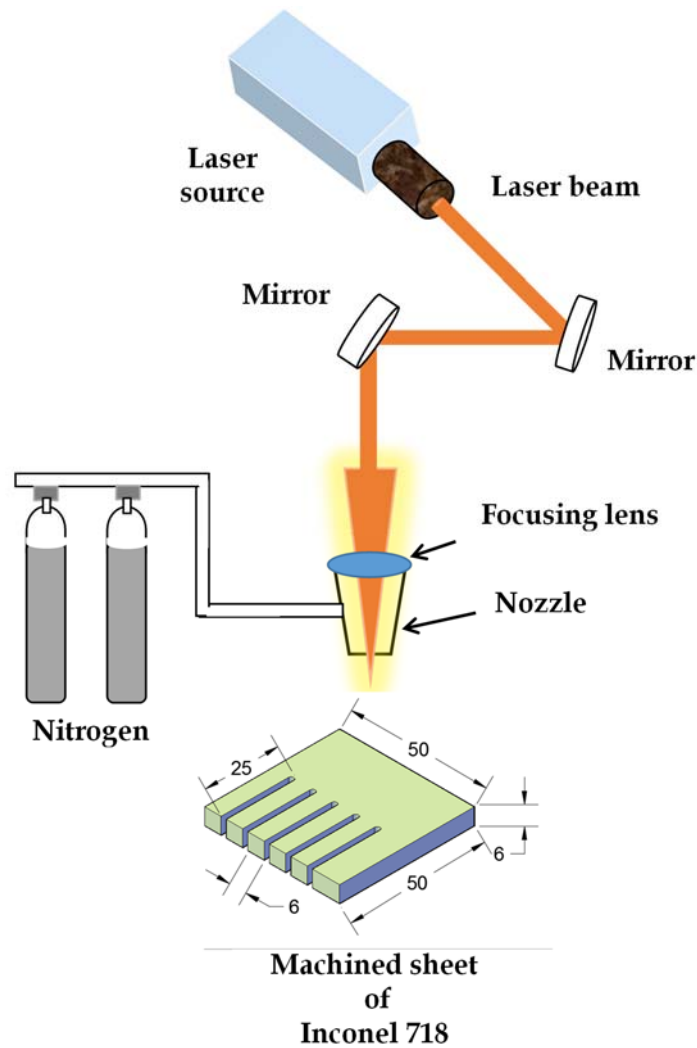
b) Schematic representation of laser cutting of Inconel 718 sheet (all dimensions are in mm).
